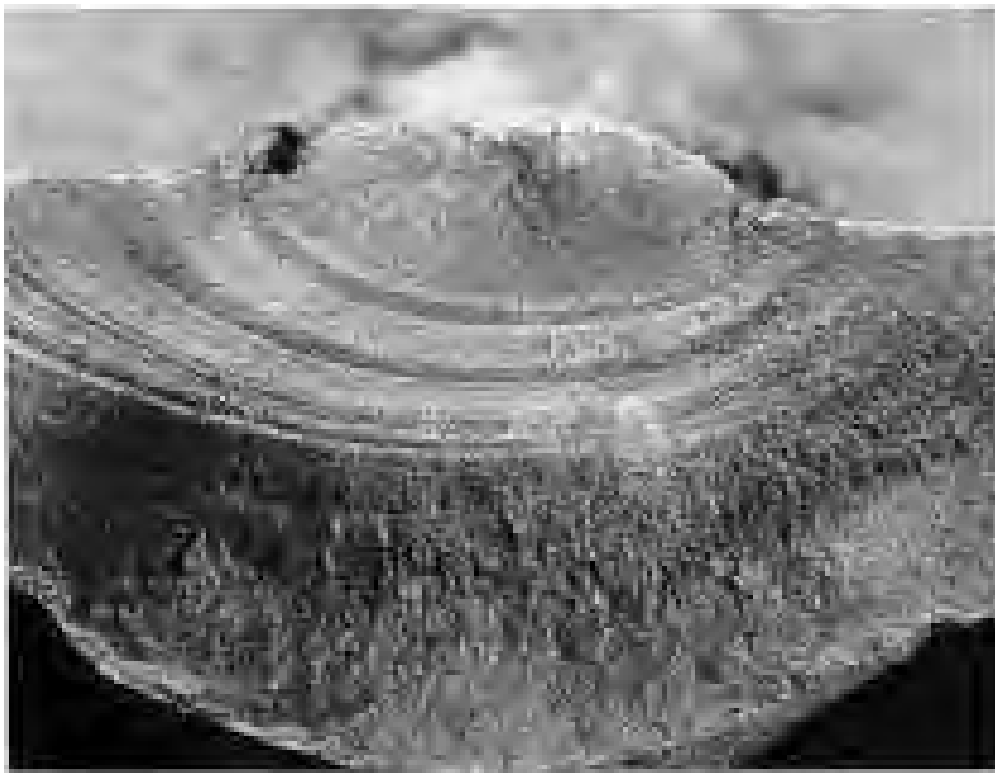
Fatigue fracture surface of a carbon steel pipe.
